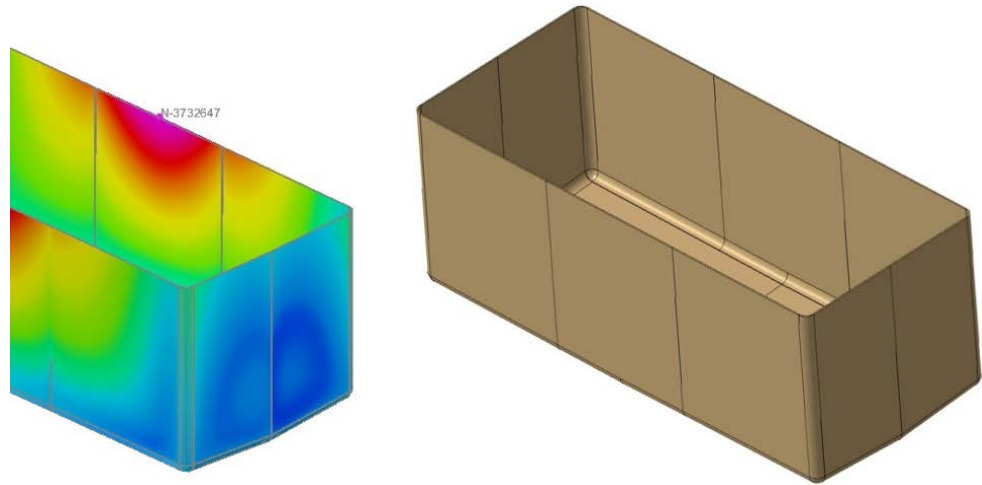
Welding of main shell plate assembly – Approach – 2
